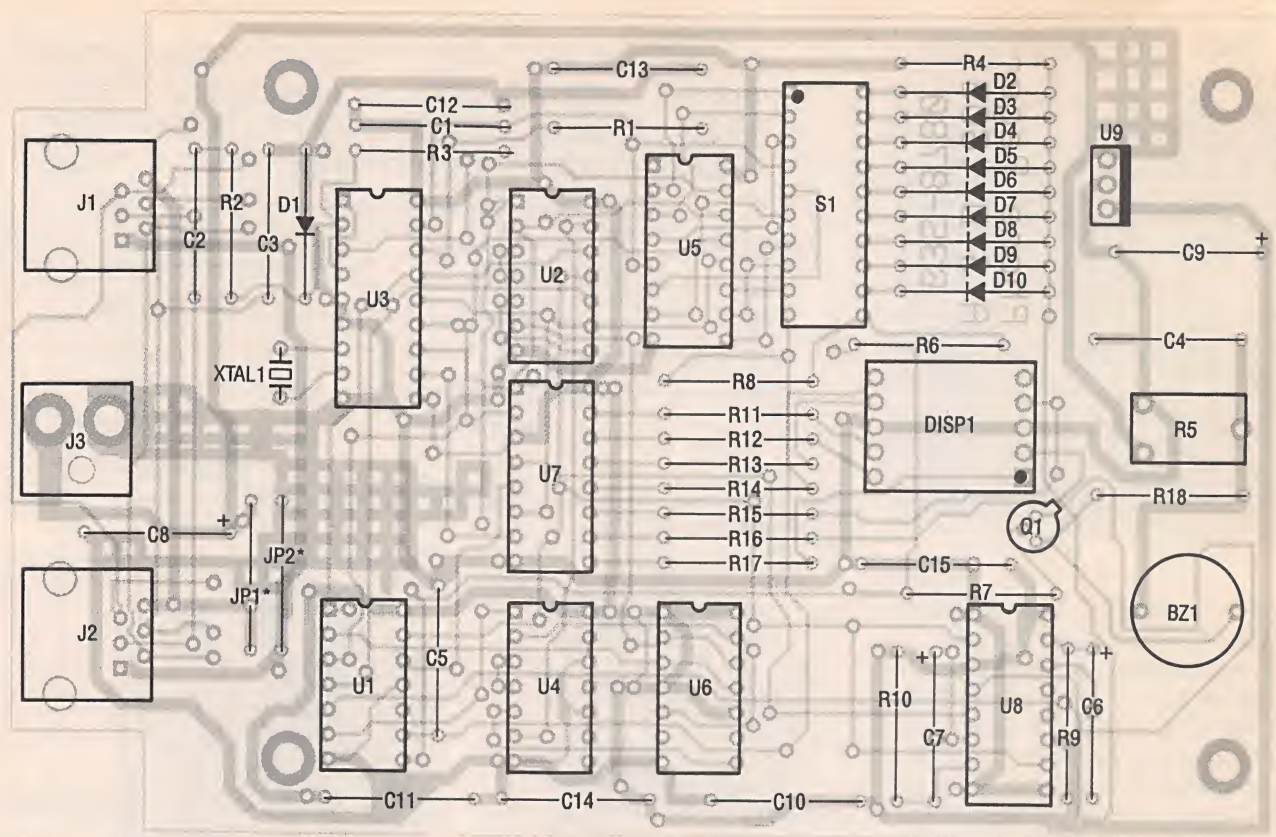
All of the components for the Phone-Pager, as shown here, were mounted on the printed-circuit board, including DISP1, which was mounted in double rows of SIP sockets.
